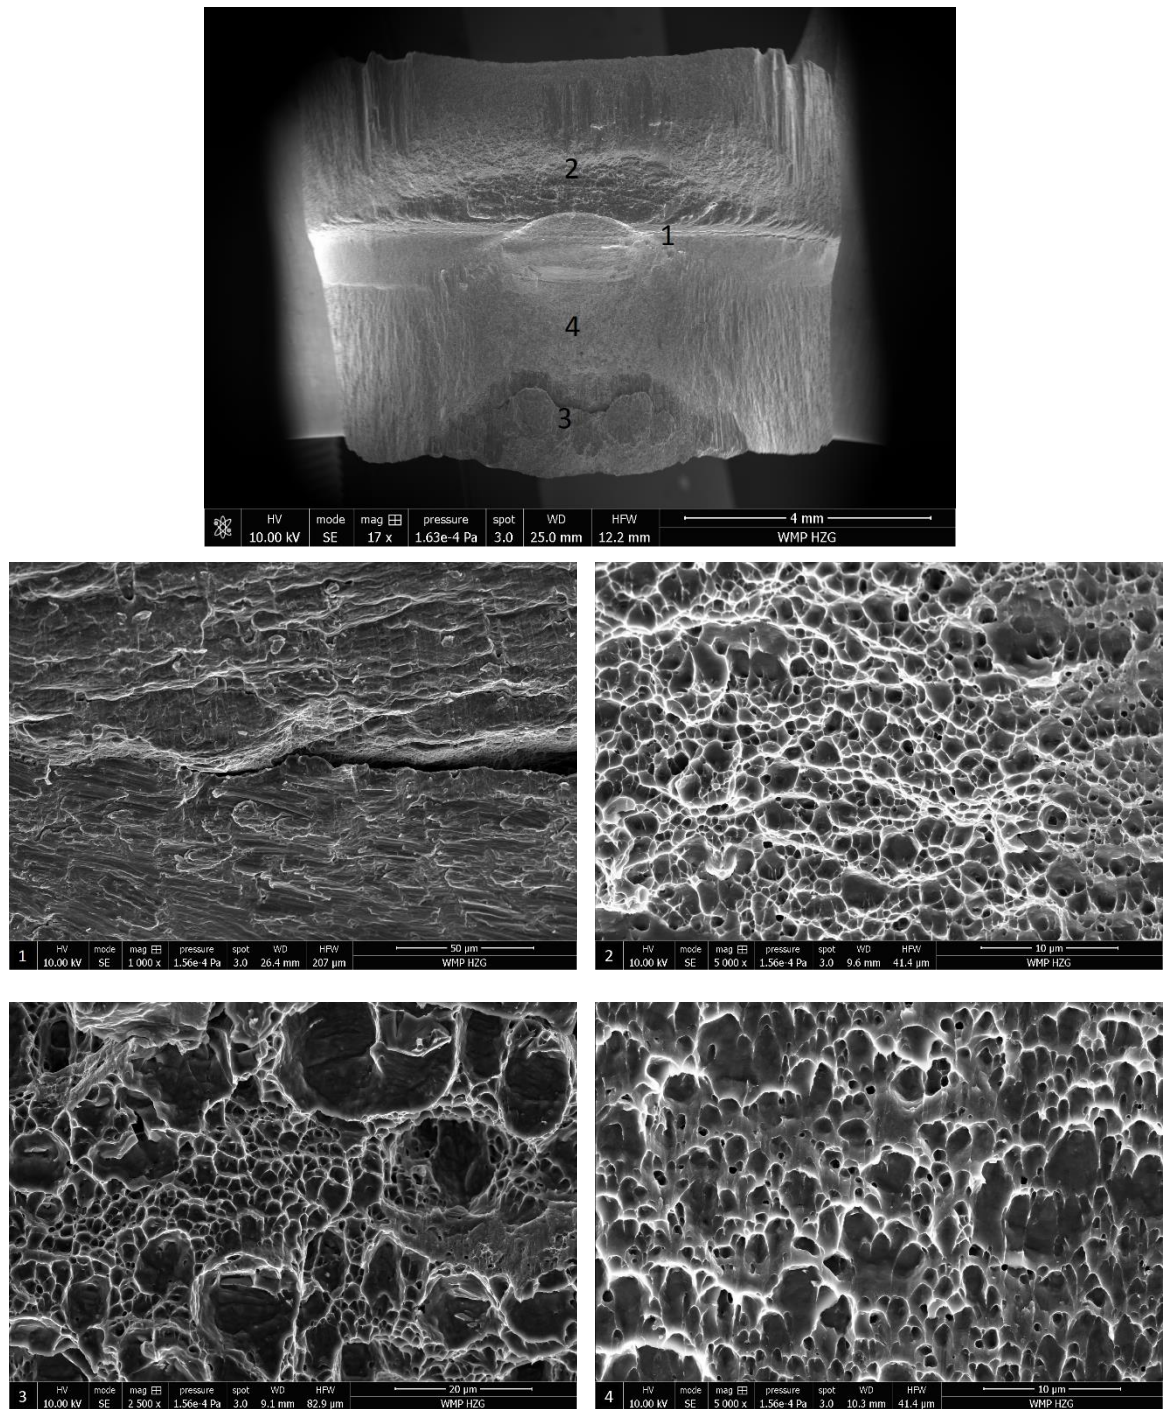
Fractographic Images of the Circumferential Pull-Out fracture mode in LST (macrograph and details)
